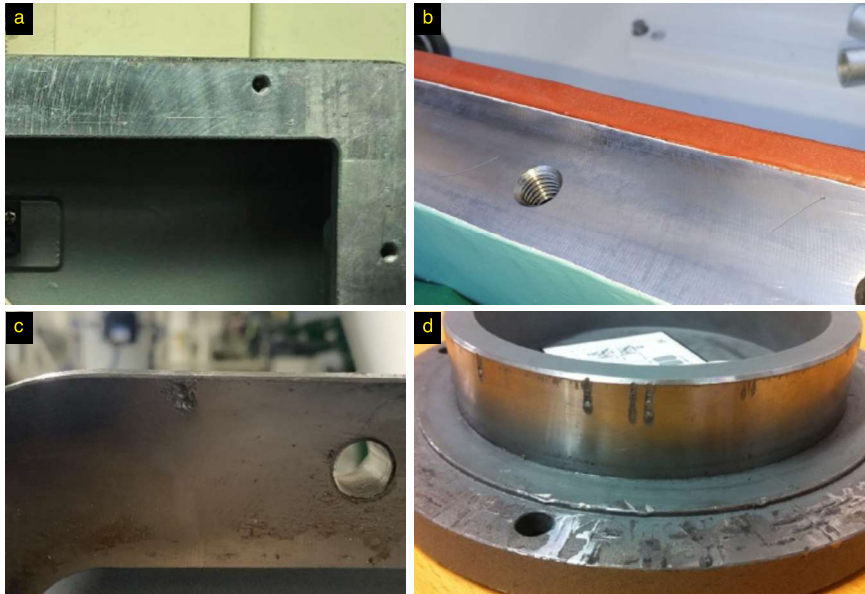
Common types of flamepath damage observed in field inspections. Clockwise: (a) Linear scratch, (b) Indentation, (c) Corrosion pit, (d) Gouge / material removal
